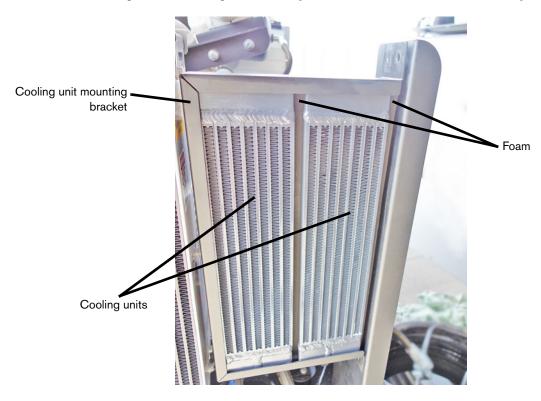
Cooling unit assembly shown without shroud and fan assembly
